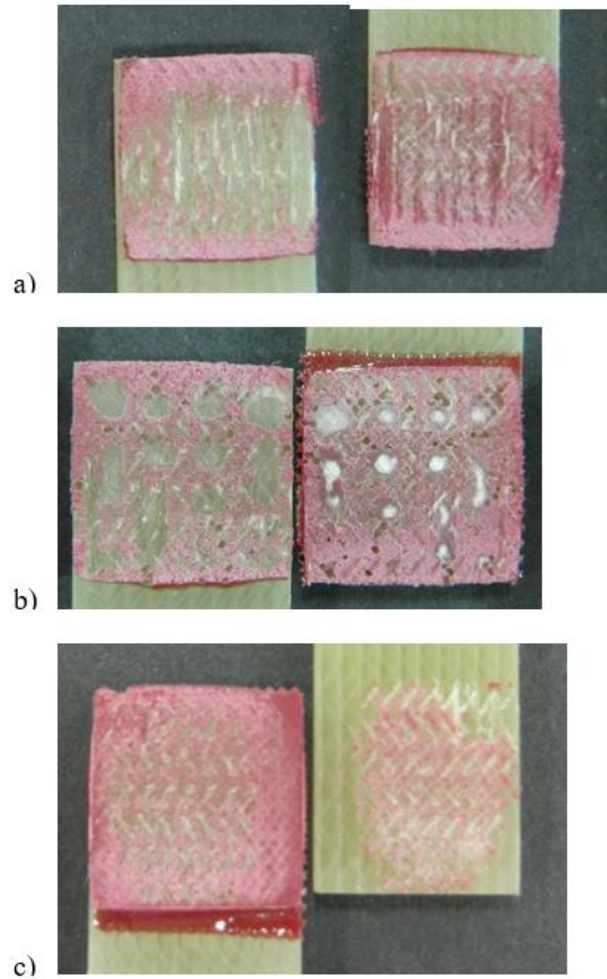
Typical film adhesive lap shear failure surfaces a) control, b) composite dust, and c) hydraulic oil specimens tested after 9 days.
